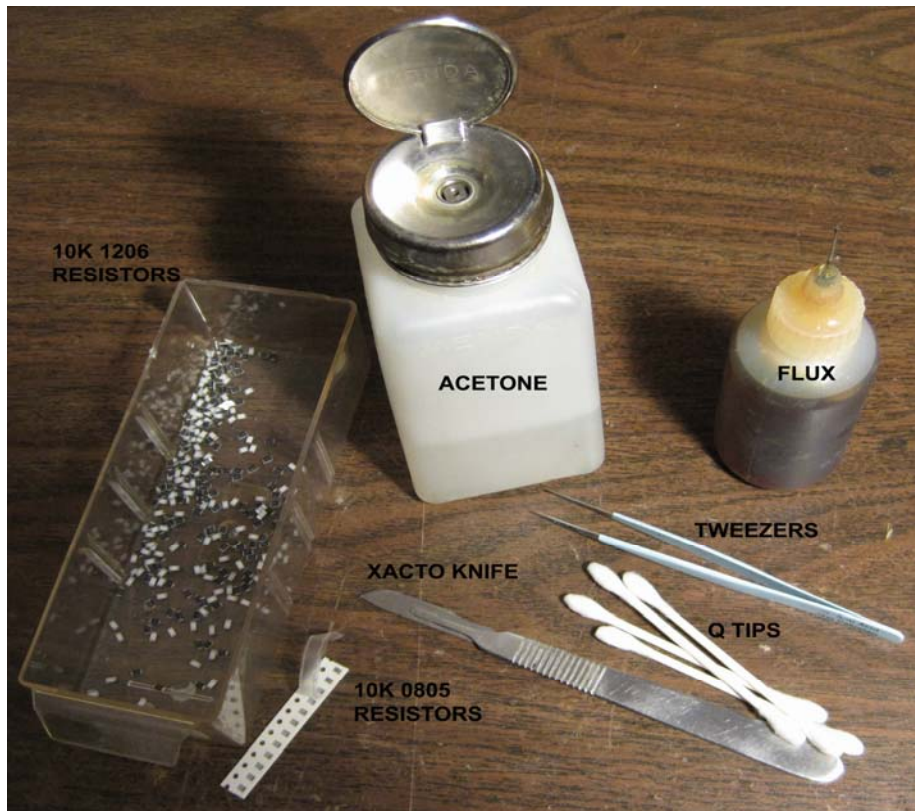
Tools – plus not shown, solder, soldering iron, screw driver, vision wear
